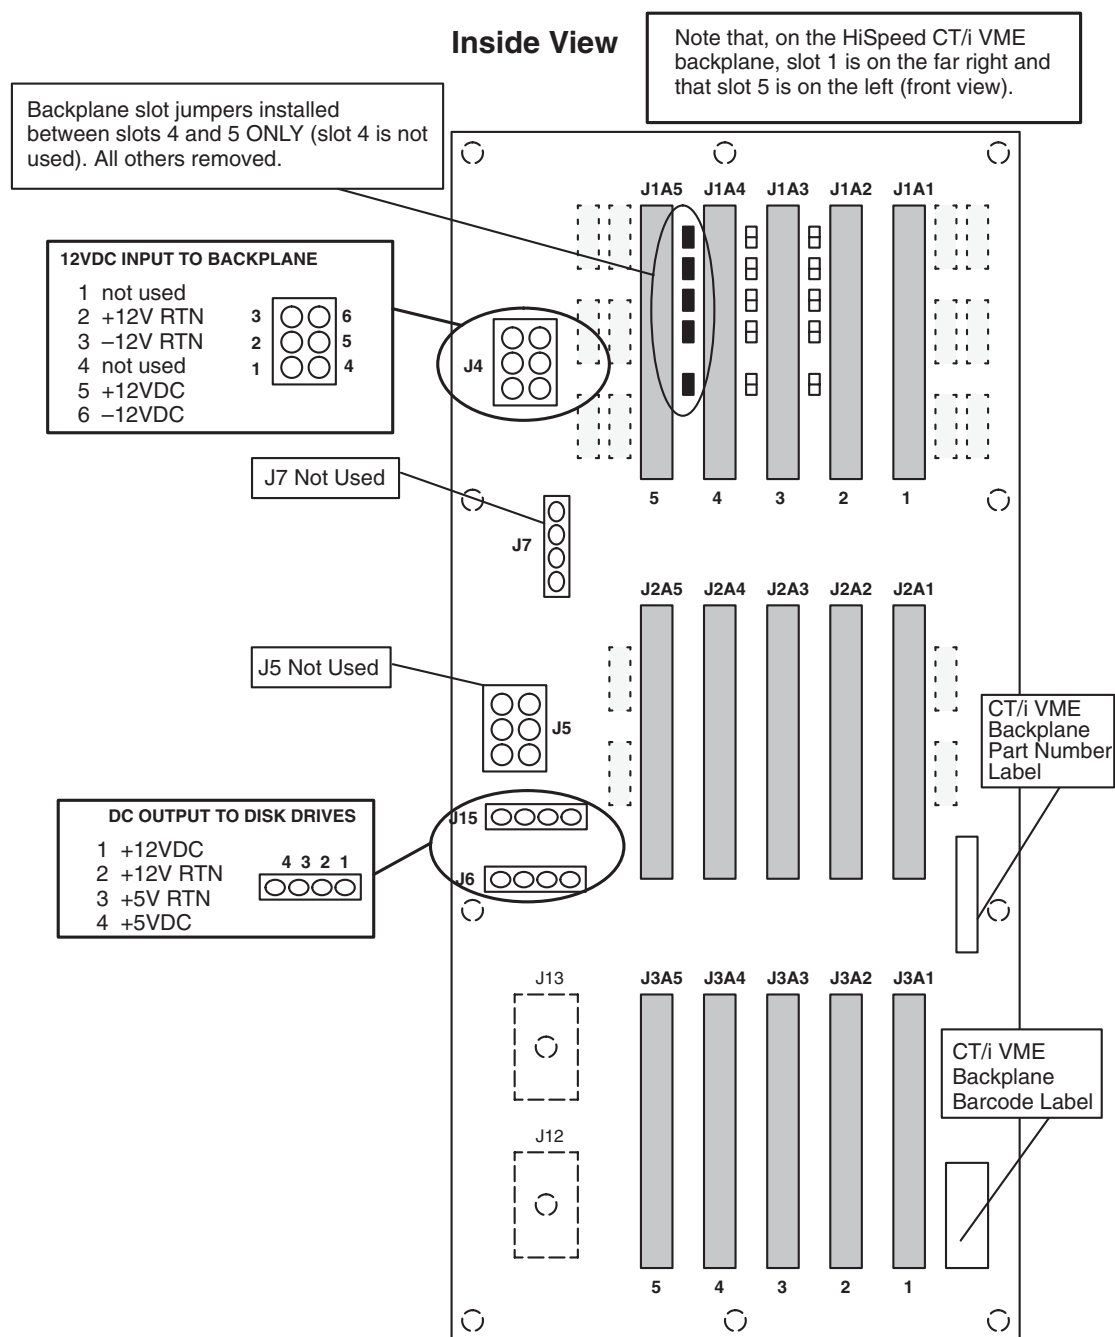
Scan Recon Chassis VME Back-plane, Inside View
